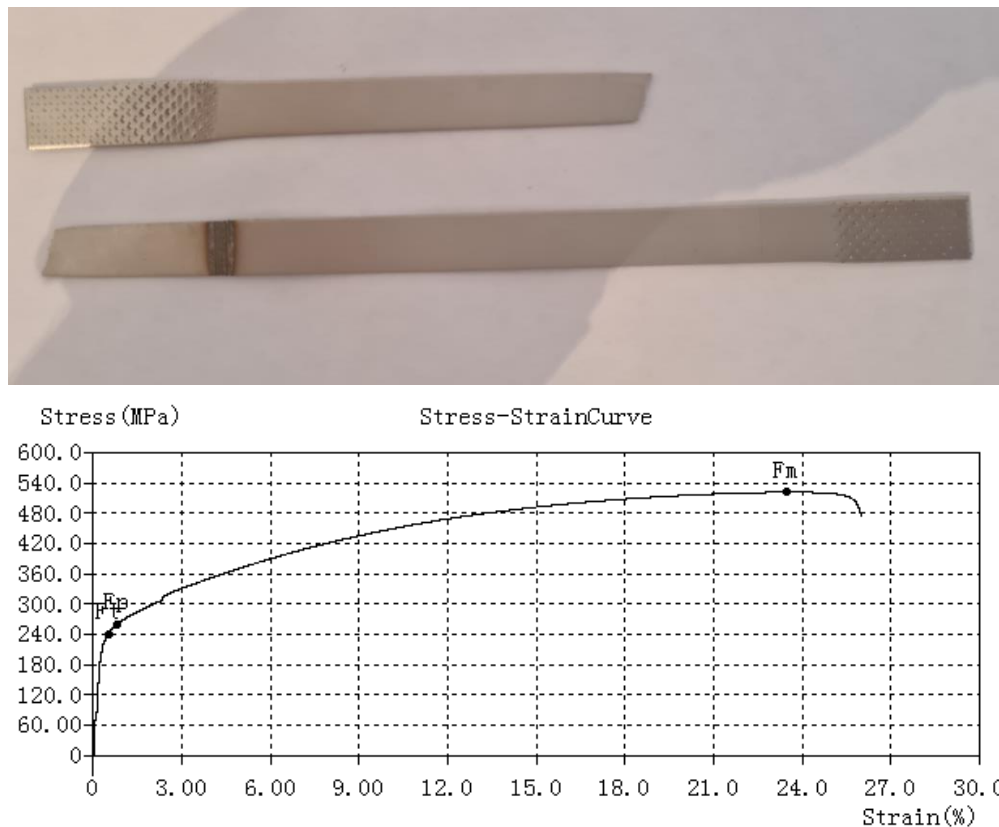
Fracture and stress-strain obtained on AISI 316 L laser welding [STA22].
